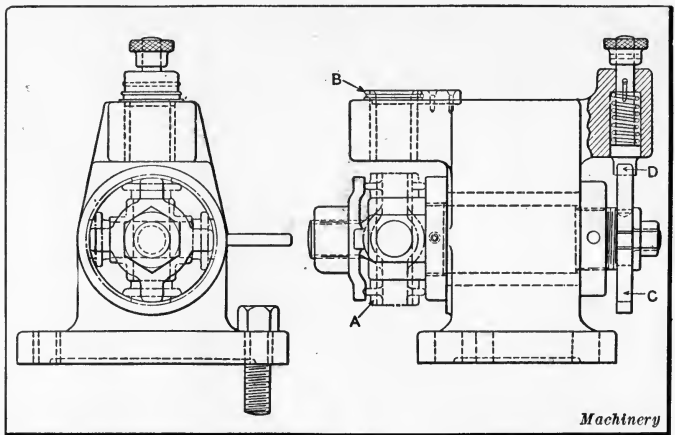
Indexing Fixture used on Drilling Machine shown in Fig. 1 for Drilling Four Holes in Universal Joint Rings
